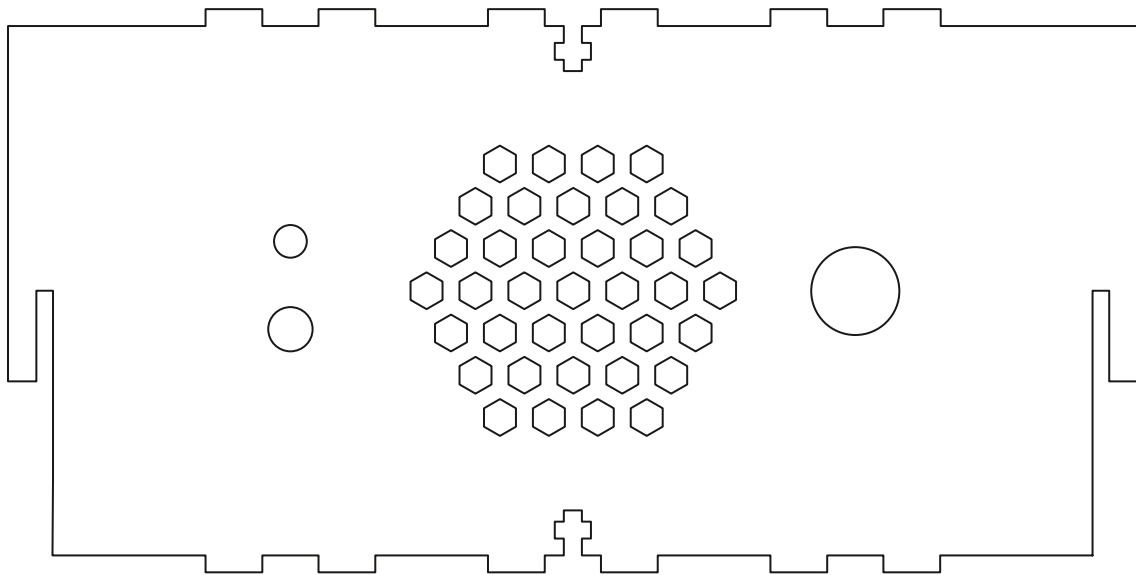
The snap fit enclosure pattern, showing cutouts for the I/O cables, fasteners, and ventilation.
